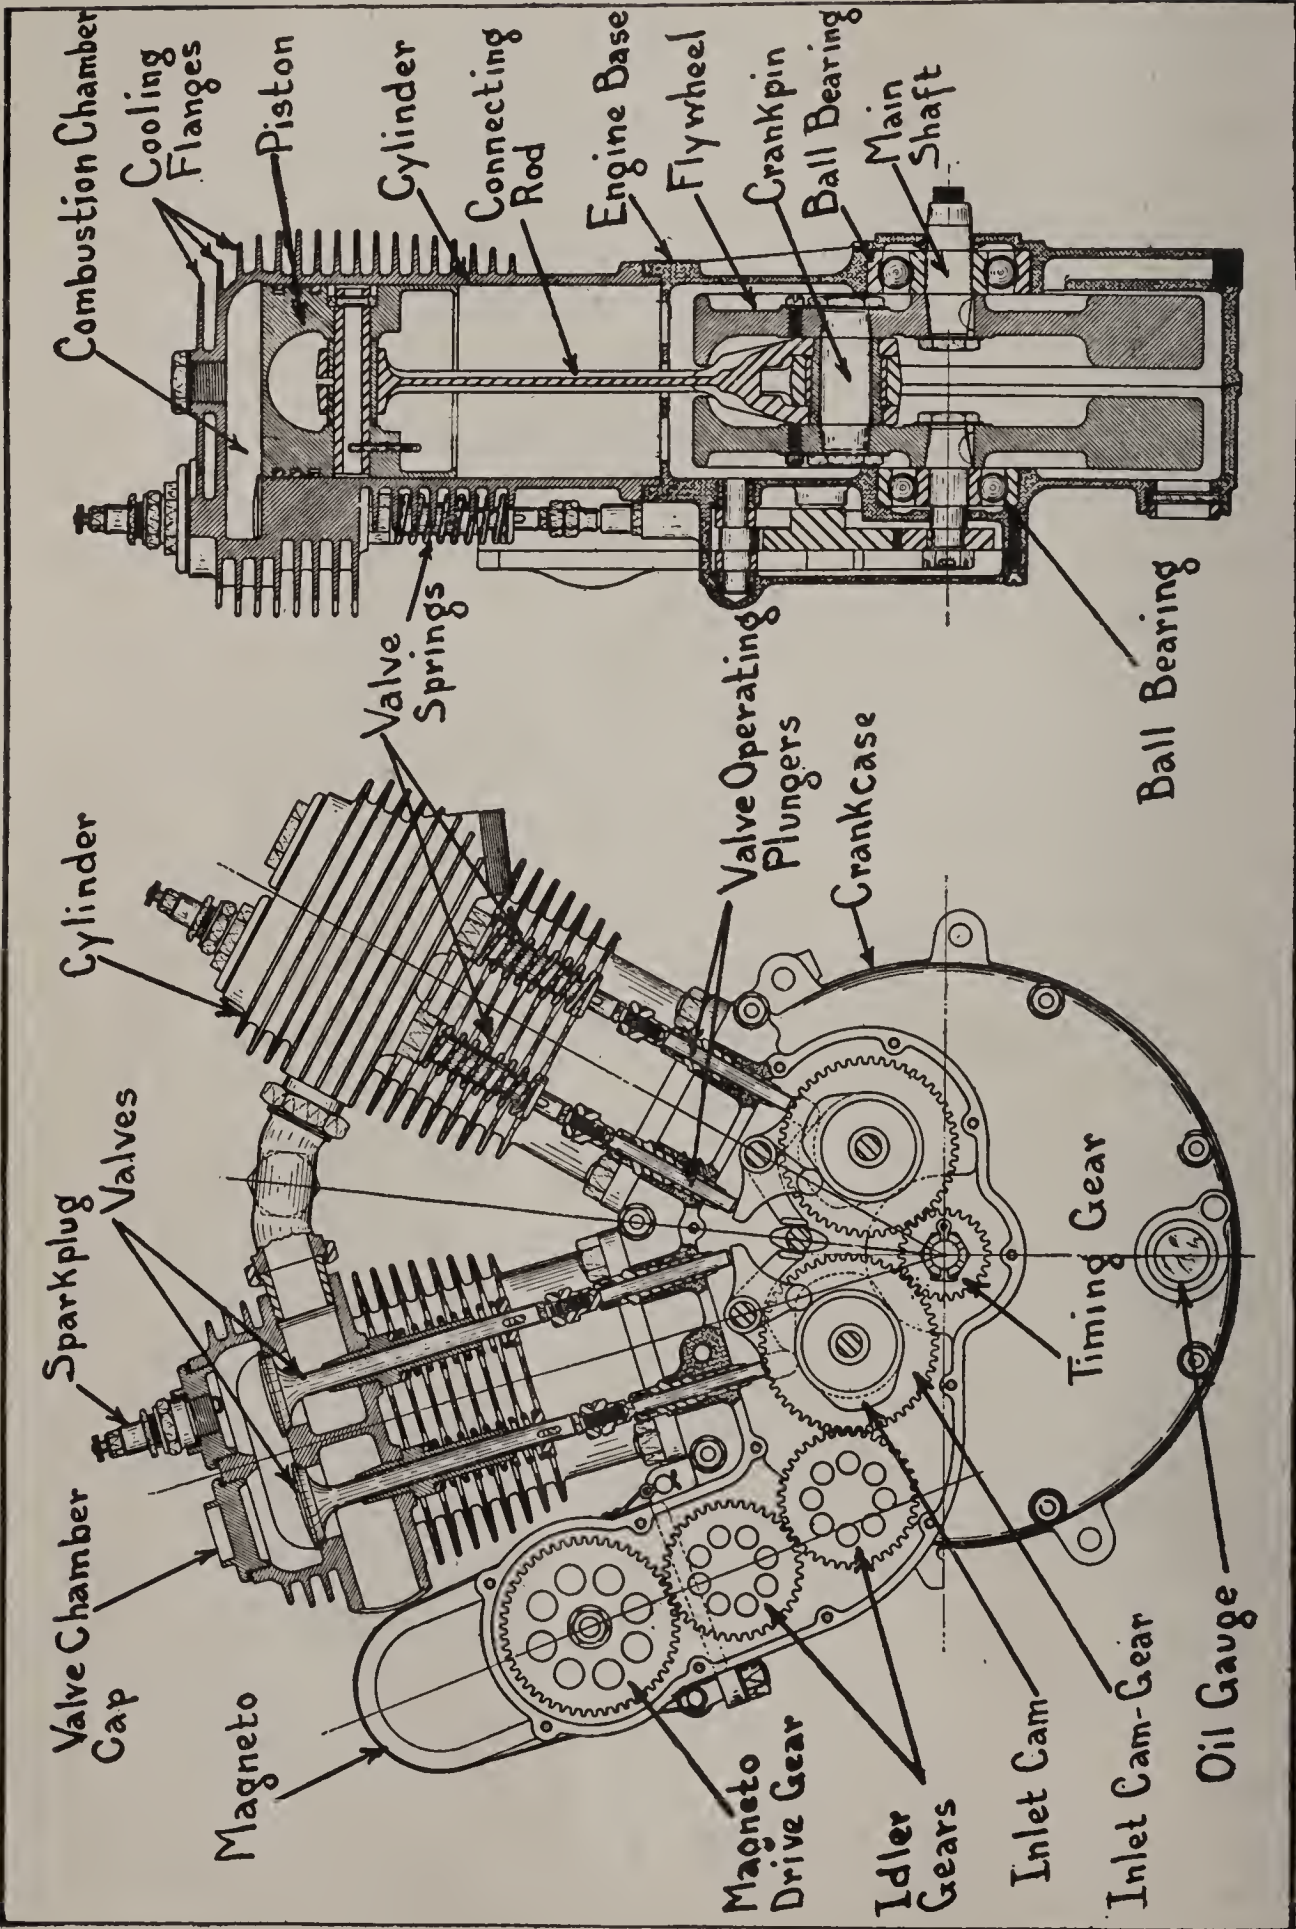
Sectional View Outlining Construction of the Reading-Standard Twin Cylinder Power Plant.
